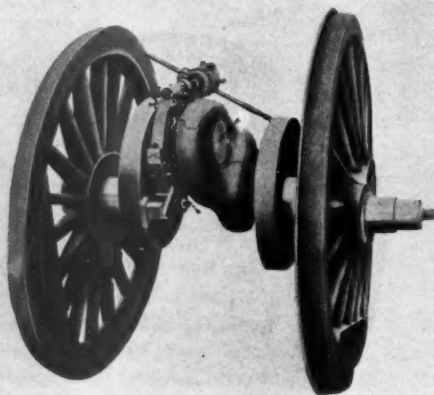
PORTABLE MACHINE AT WORK. AIR MOTOR DRIVE.
